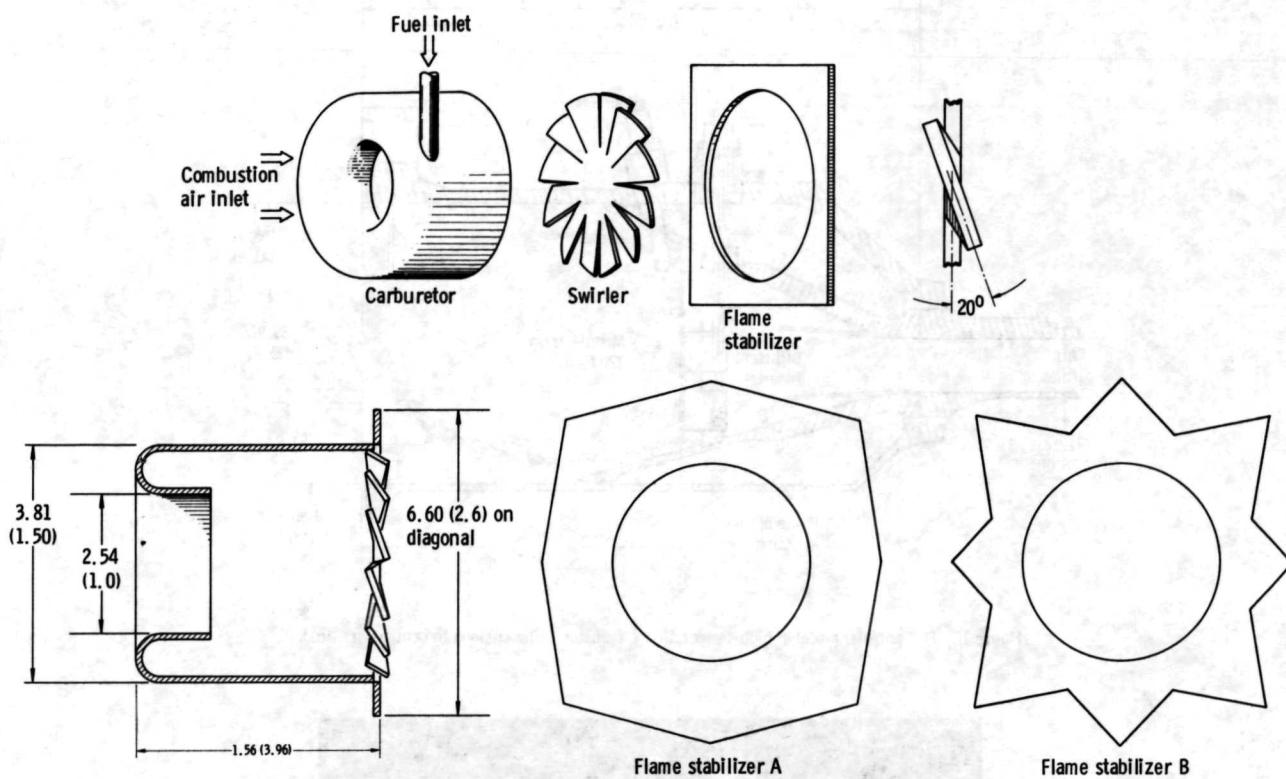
Combustor module details. (Dimensions in centimeters (In.).)
